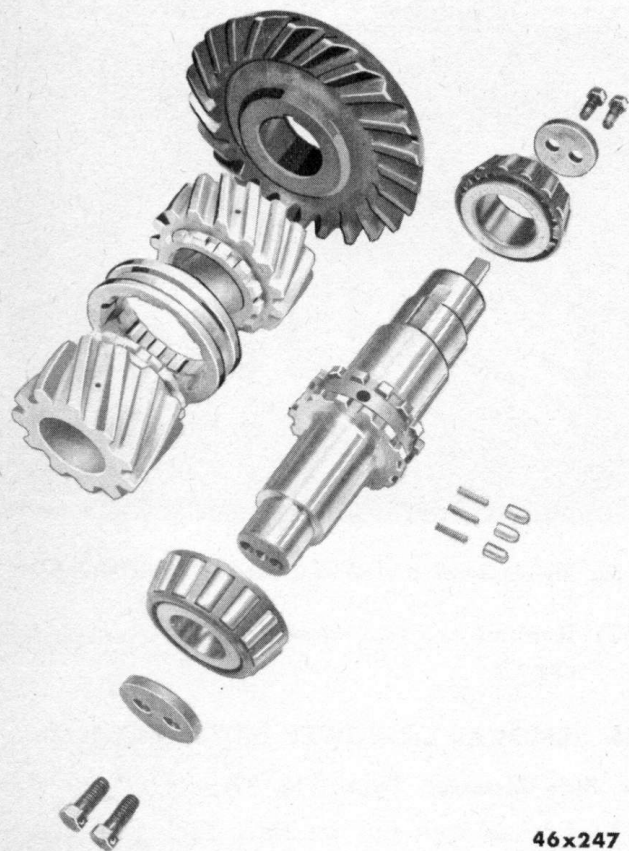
Cross Shaft Assembly, Showing Bearing Retaining Plates
